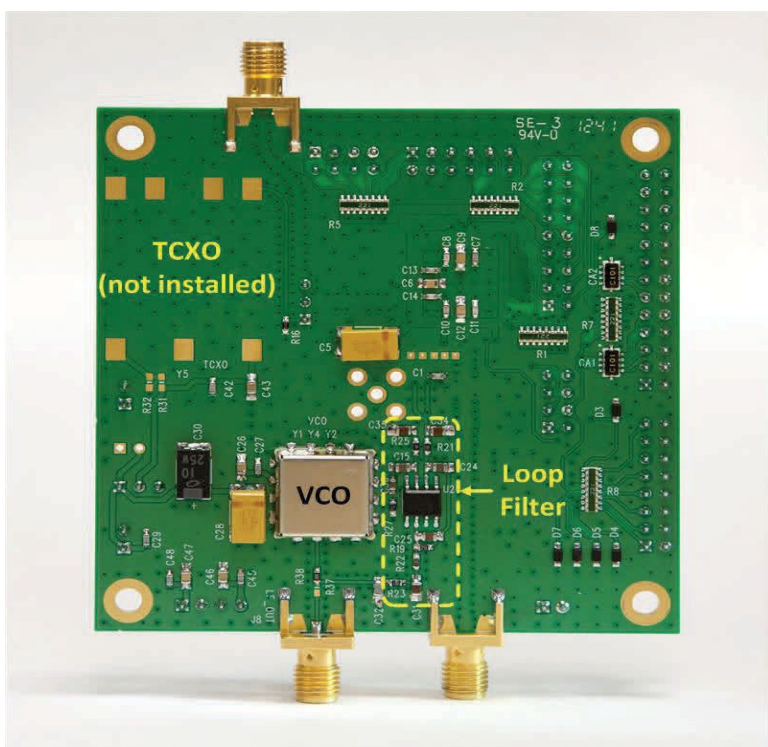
PE97240 Evaluation Board Showing Back-side Assembly
